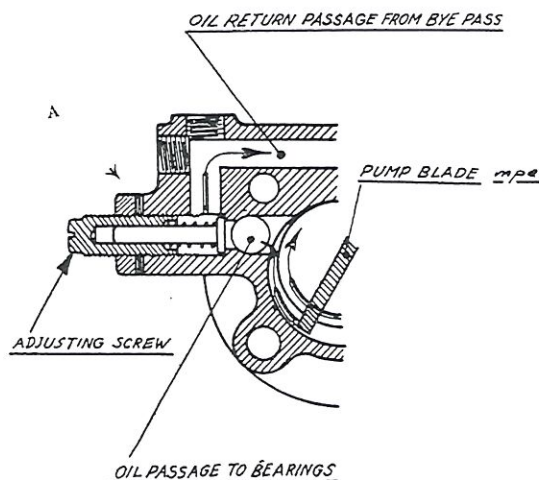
SECTION SHOWING THE OIL PRESSURE RELEASE VALVE.
